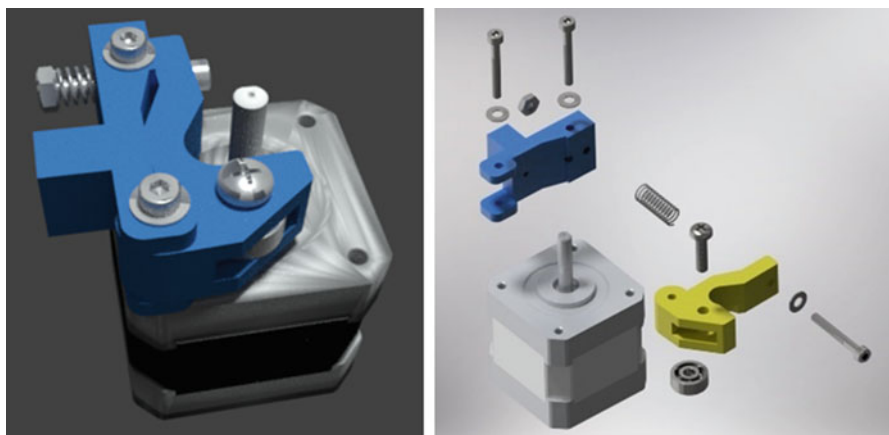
The virtual 3D model used for automated generation of the 2D training set of images (left), exploded view for experimental recognition process (right)
